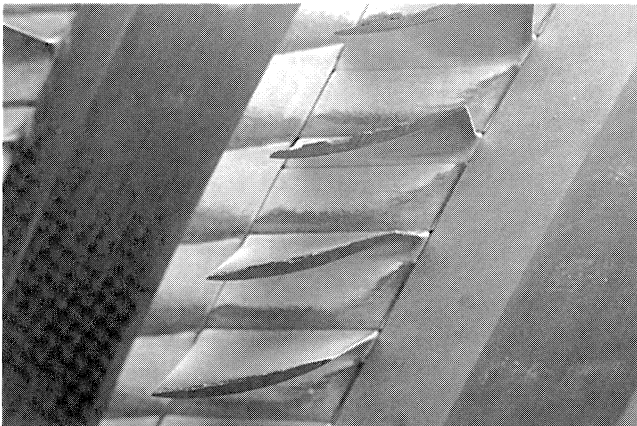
Blade Tip Rub on a Gas Turbine Axial Flow Compressor.
